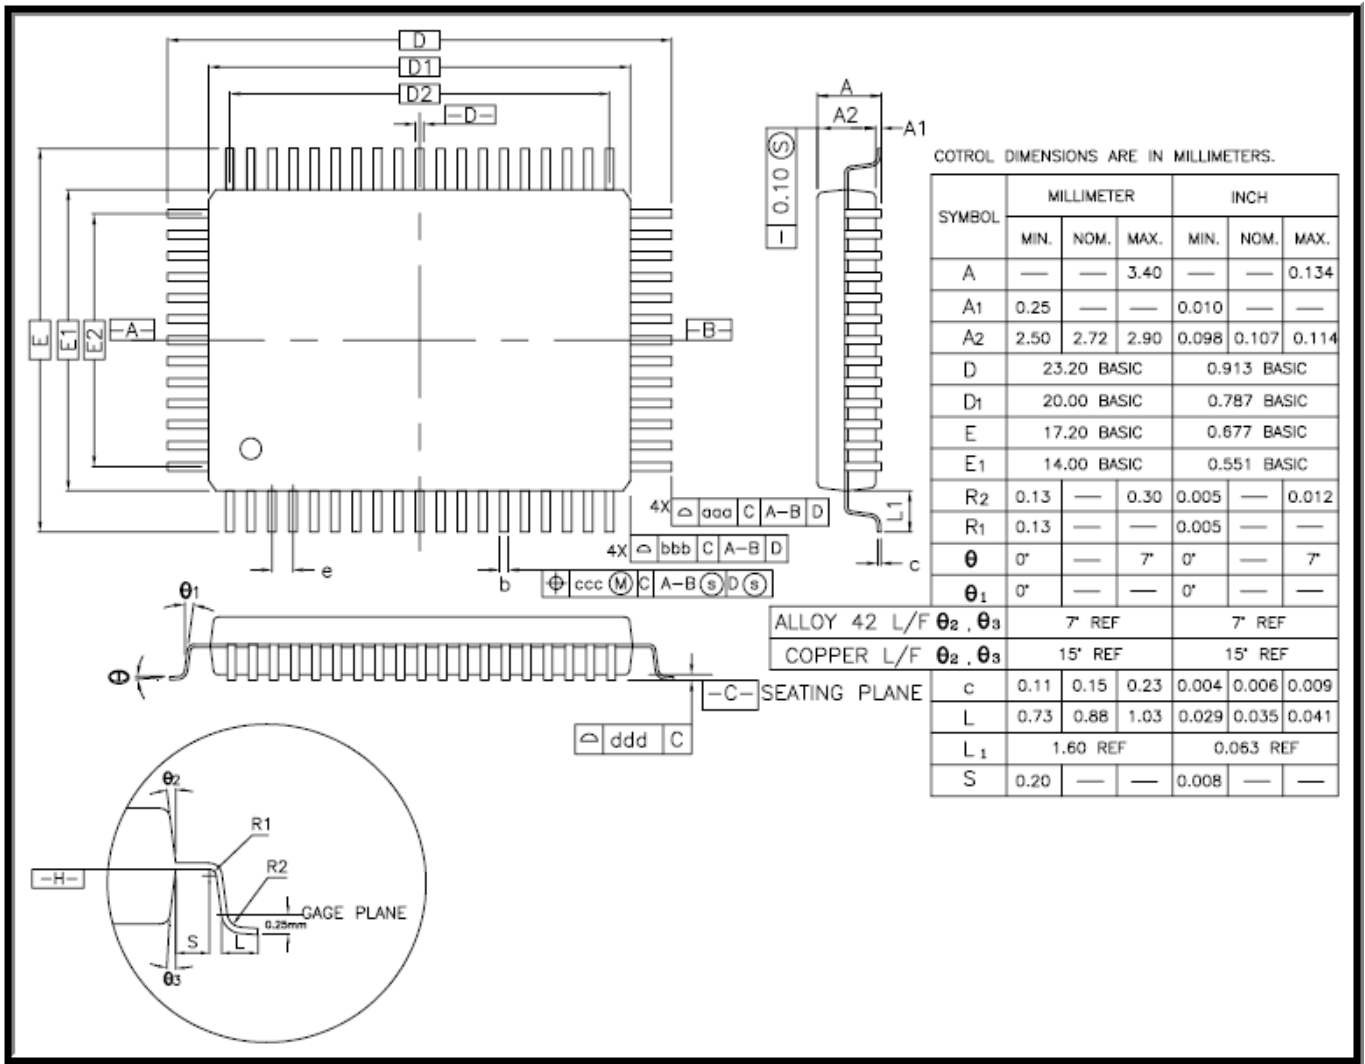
CNS2135 Package Outline and Dimensions— PQFP-128
